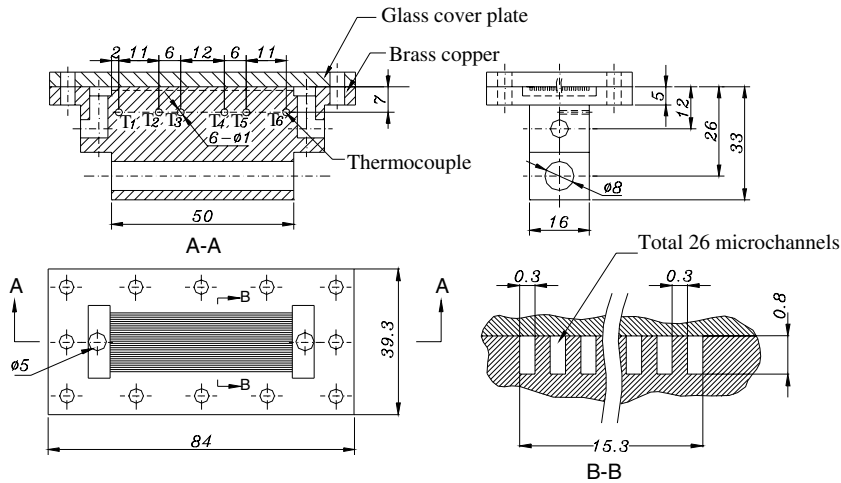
Detailed technical drawing of the copper microchannel heat sink.
